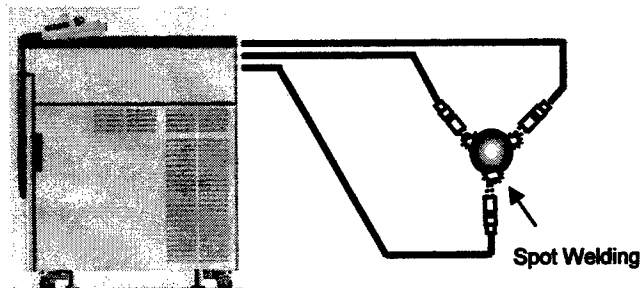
Simultaneous three-point spot welding for optical modules.
